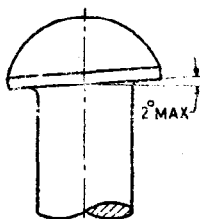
TOLERANCE ON RIVET HEAD
